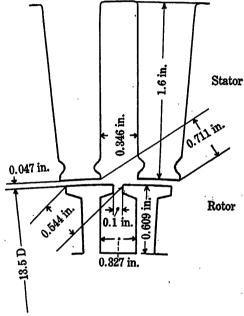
DIMENSIONS OF STATOR AND ROTOR PUNCHINGS
